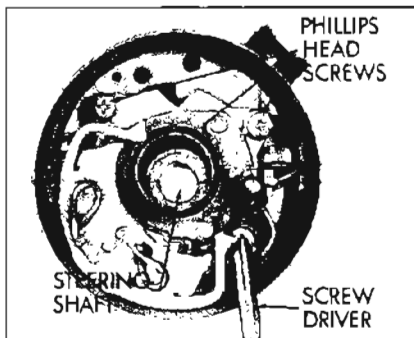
Removing Steering Shaft Upper Bearing Adapter Screws
